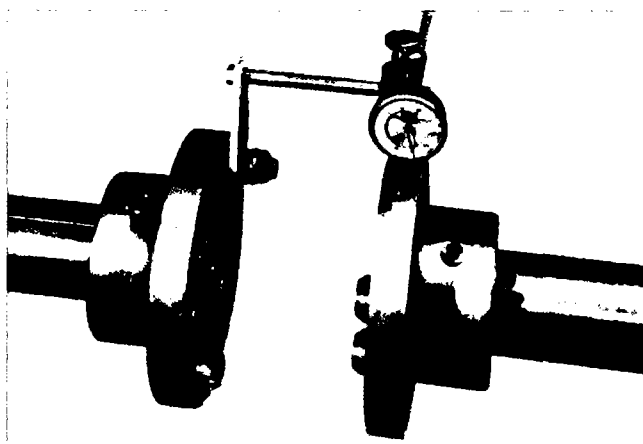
Checking parallel alignment with dial indicator on coupling flange.
